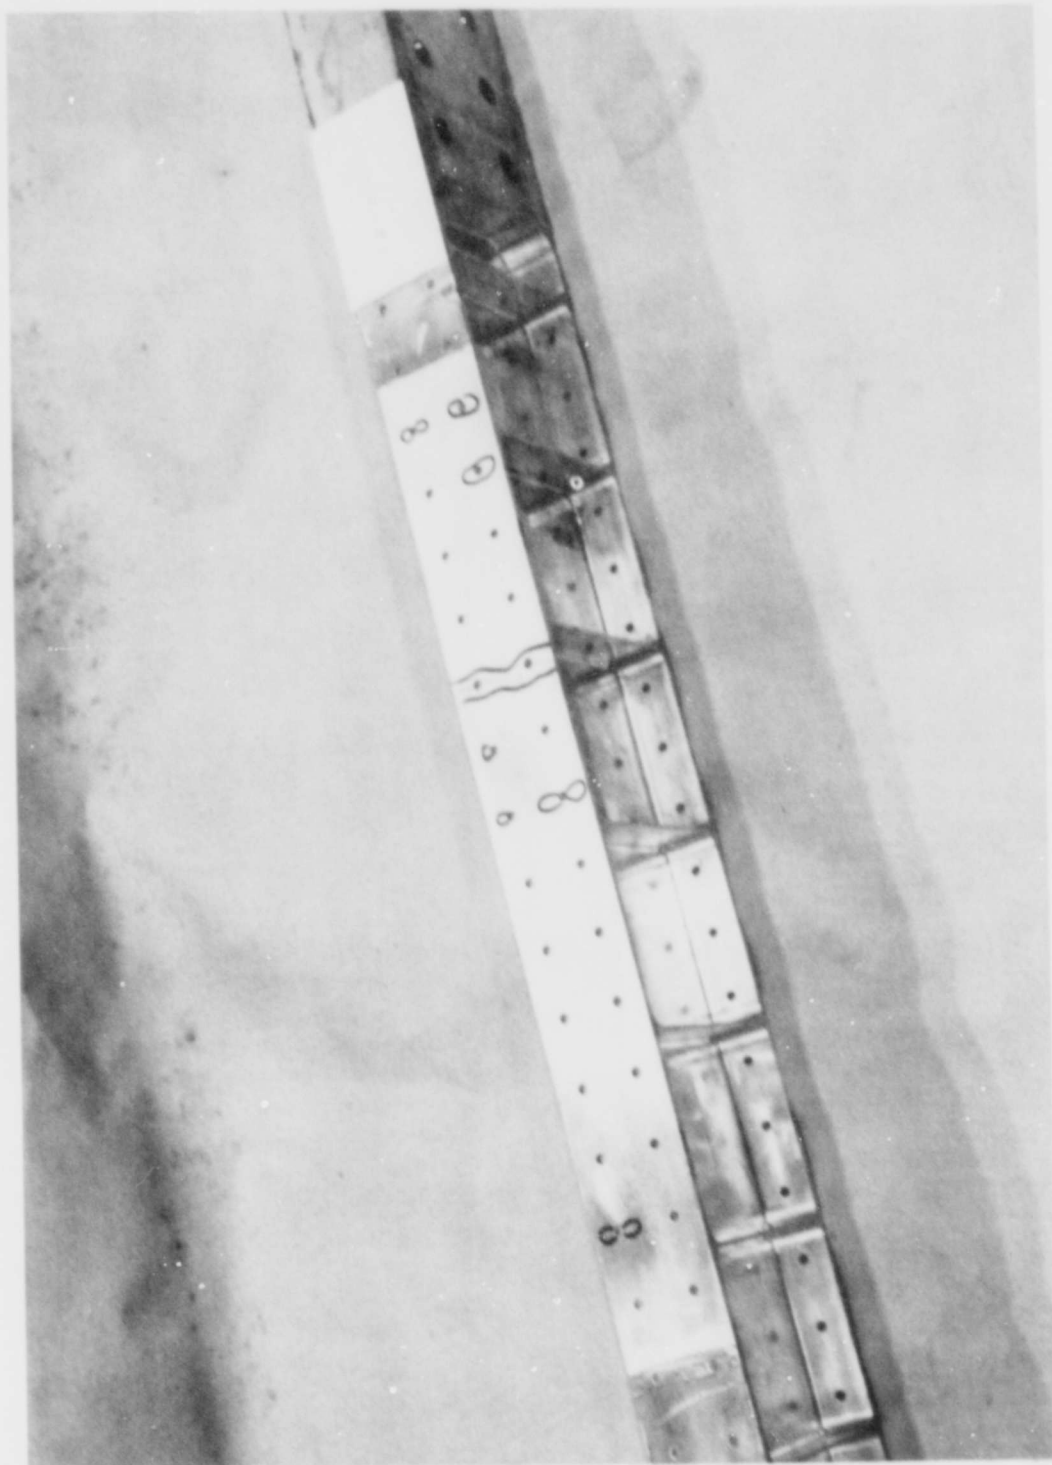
ALUMINUM I-BEAM FAILURE, WITH FASTENER HOLES, S/N F411316
